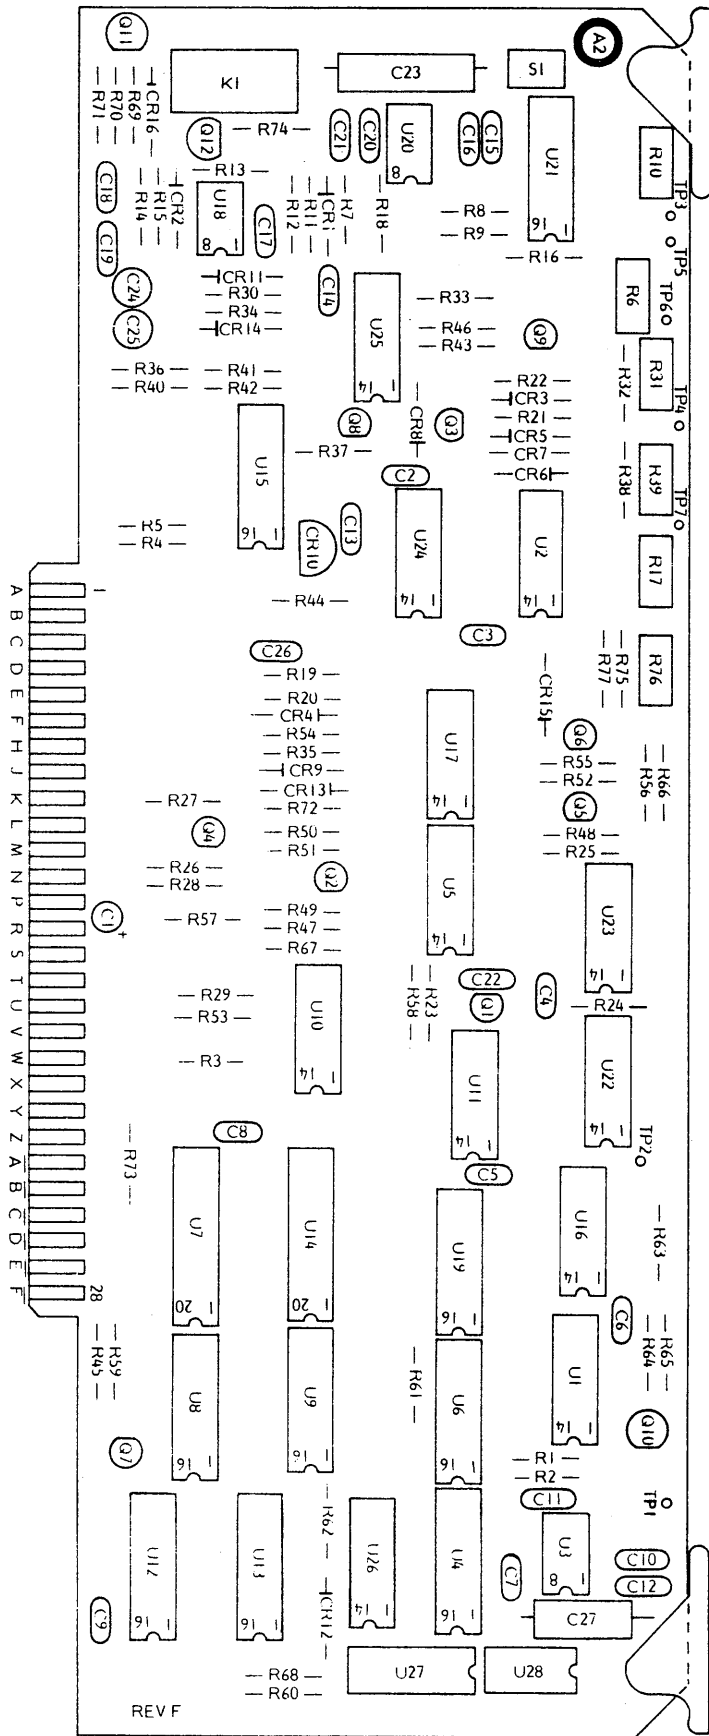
A2 Ramp Generator PCB Schematic (Sheet 3 of 3)
